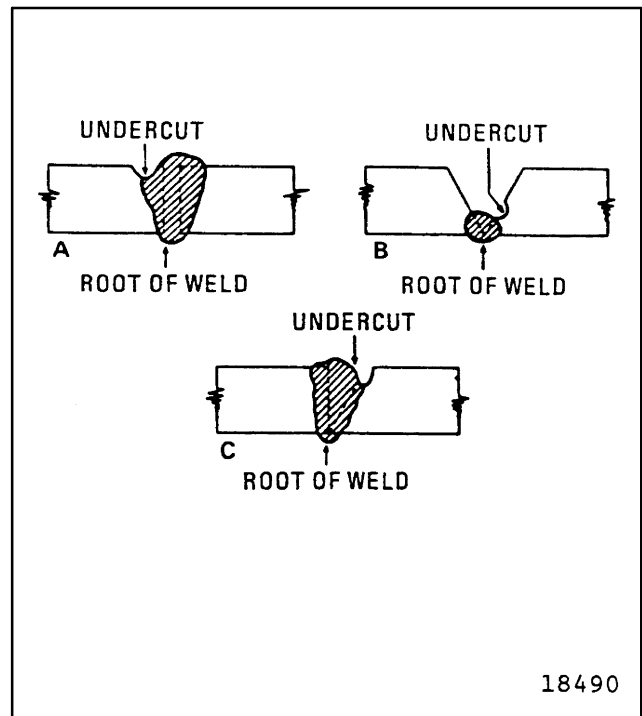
Undercutting in Butt Joint Welds
